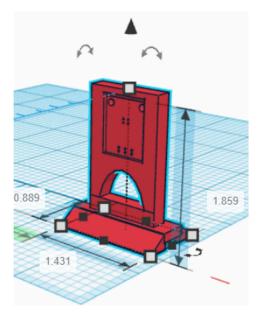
Galvo, laser and Driver mount Galvo, laser and Driver mount stand
